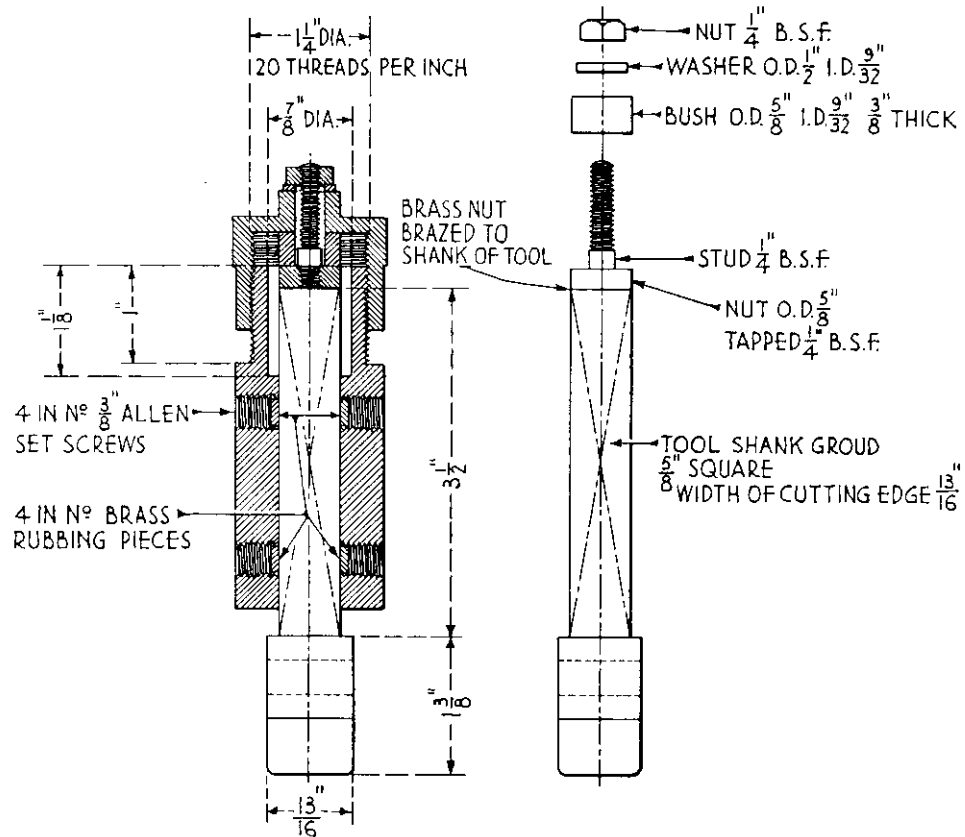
DETAILS OF TOOL ASSEMBLY
